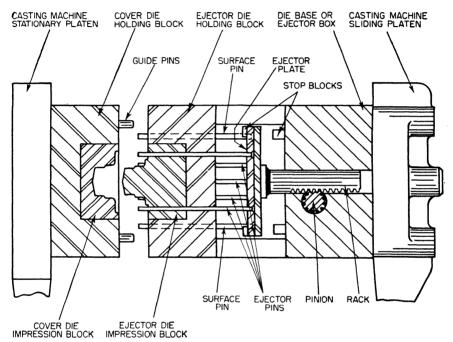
Essential components of a simple die-casting die. Gates, cores, slides, vents, insert locators, and actuating mechanisms for movable die members usually must be added to this basic structure.
